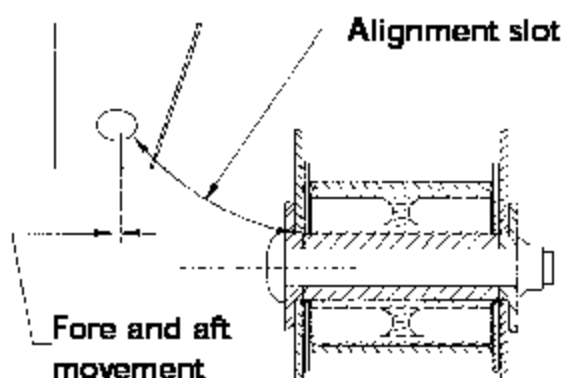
Showing fore and aft movement for the Welded Collar
